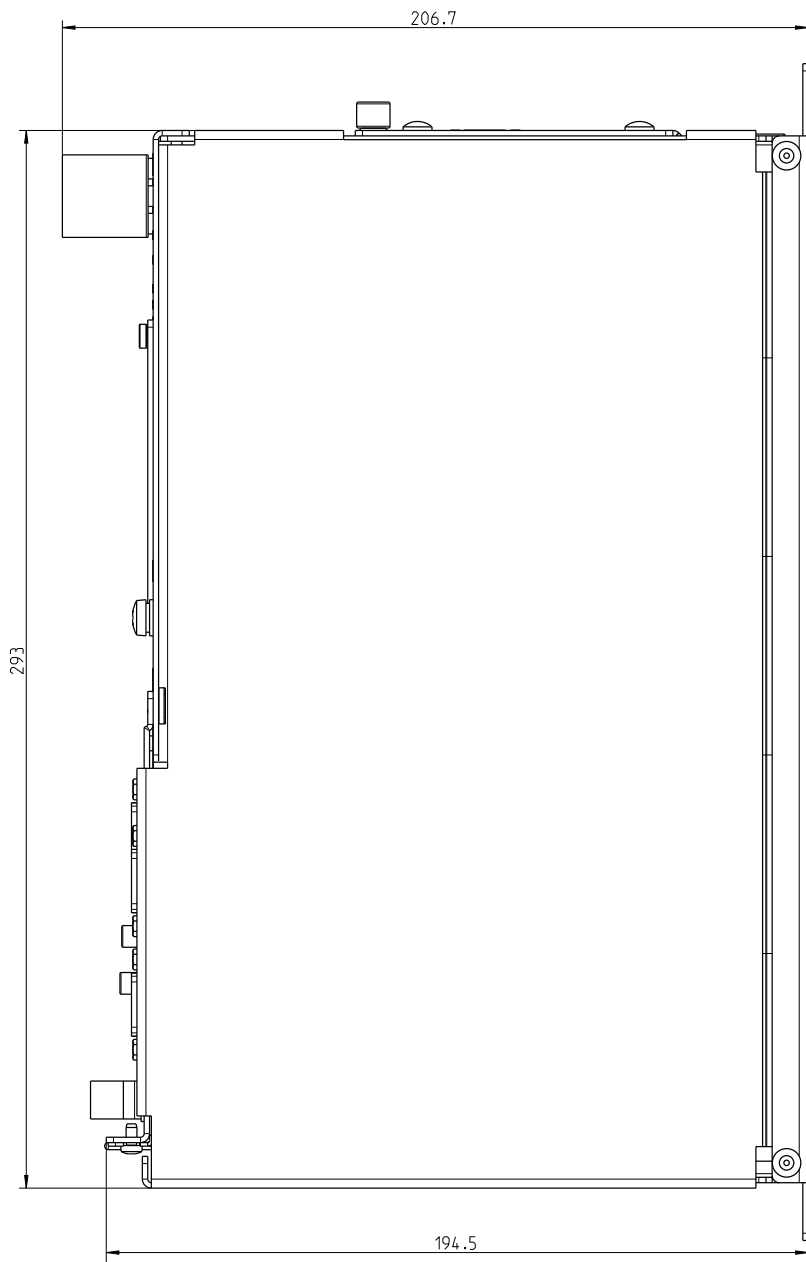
Housing dimensions, devices with four slots, side view from the right
